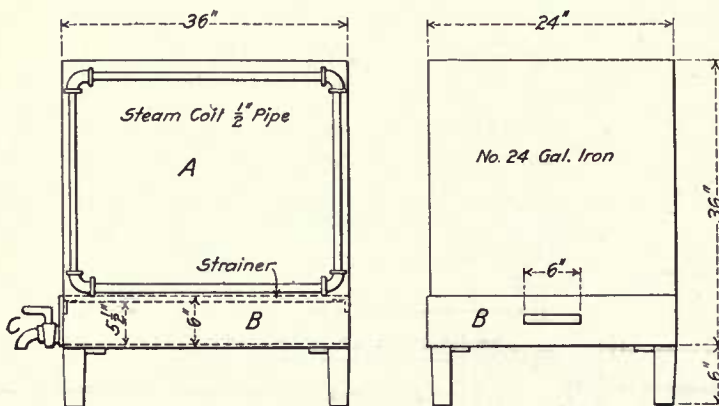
Tank for Removing the Oil from Old Journal Box Packing.
